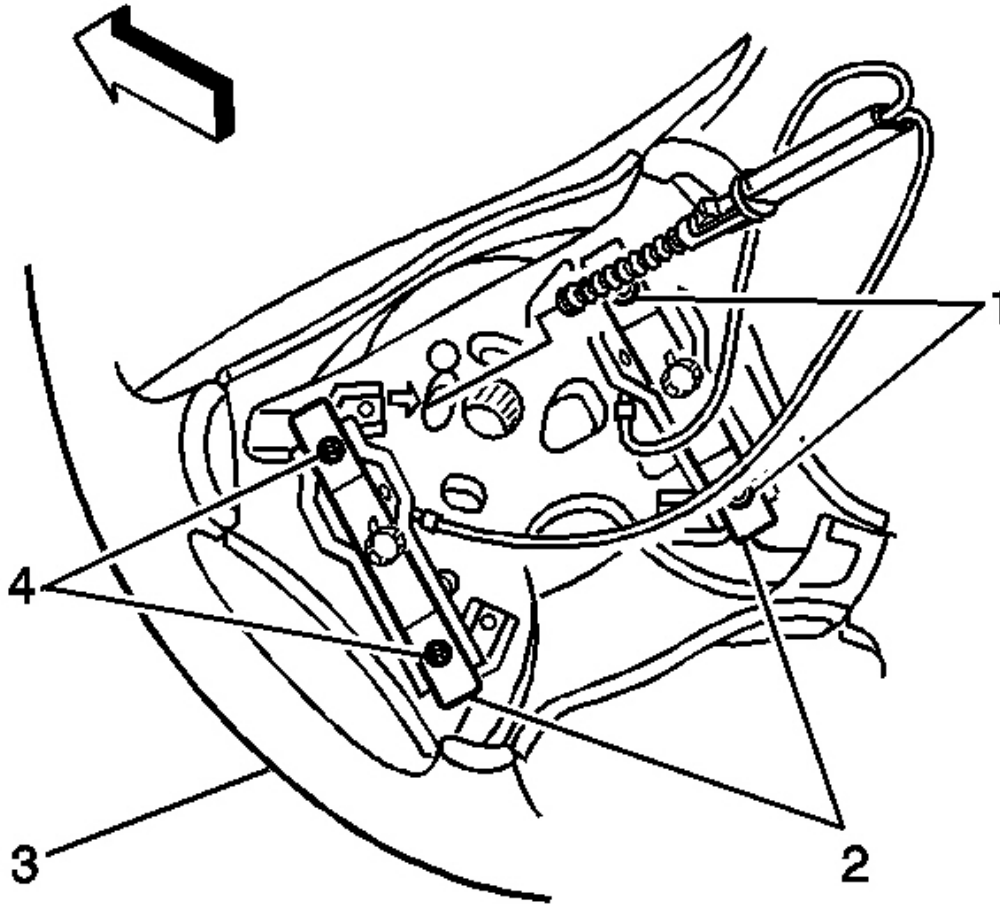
View of Horn Contact Plate, Steering Wheel & Screws
